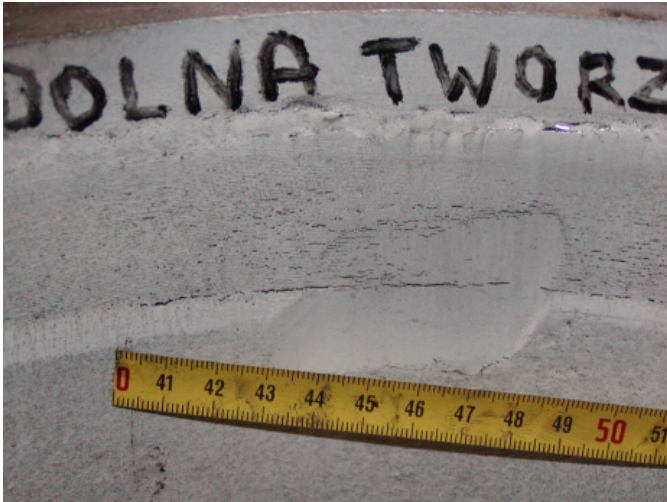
Thermal shock cracks on the inside of the lower generatrix at a distance of 40 mm from an axis of the weld
